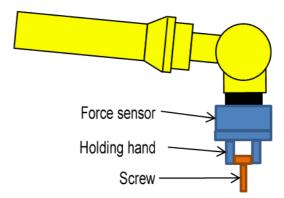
(d) The screw area is in the center of the rotary axis of the auxiliary axis
